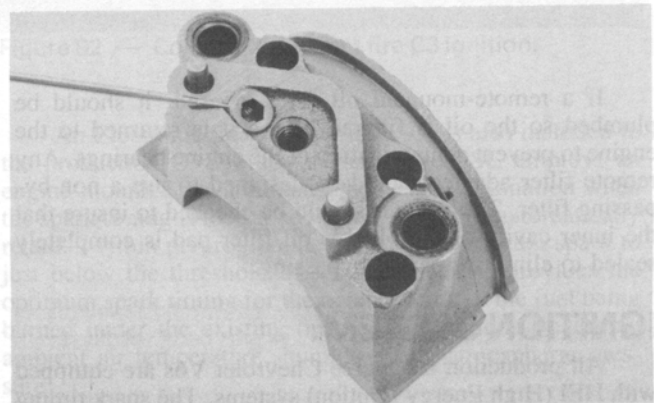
Plug oil pump passage in rear main bearing when installing external dry sump oil pump.
